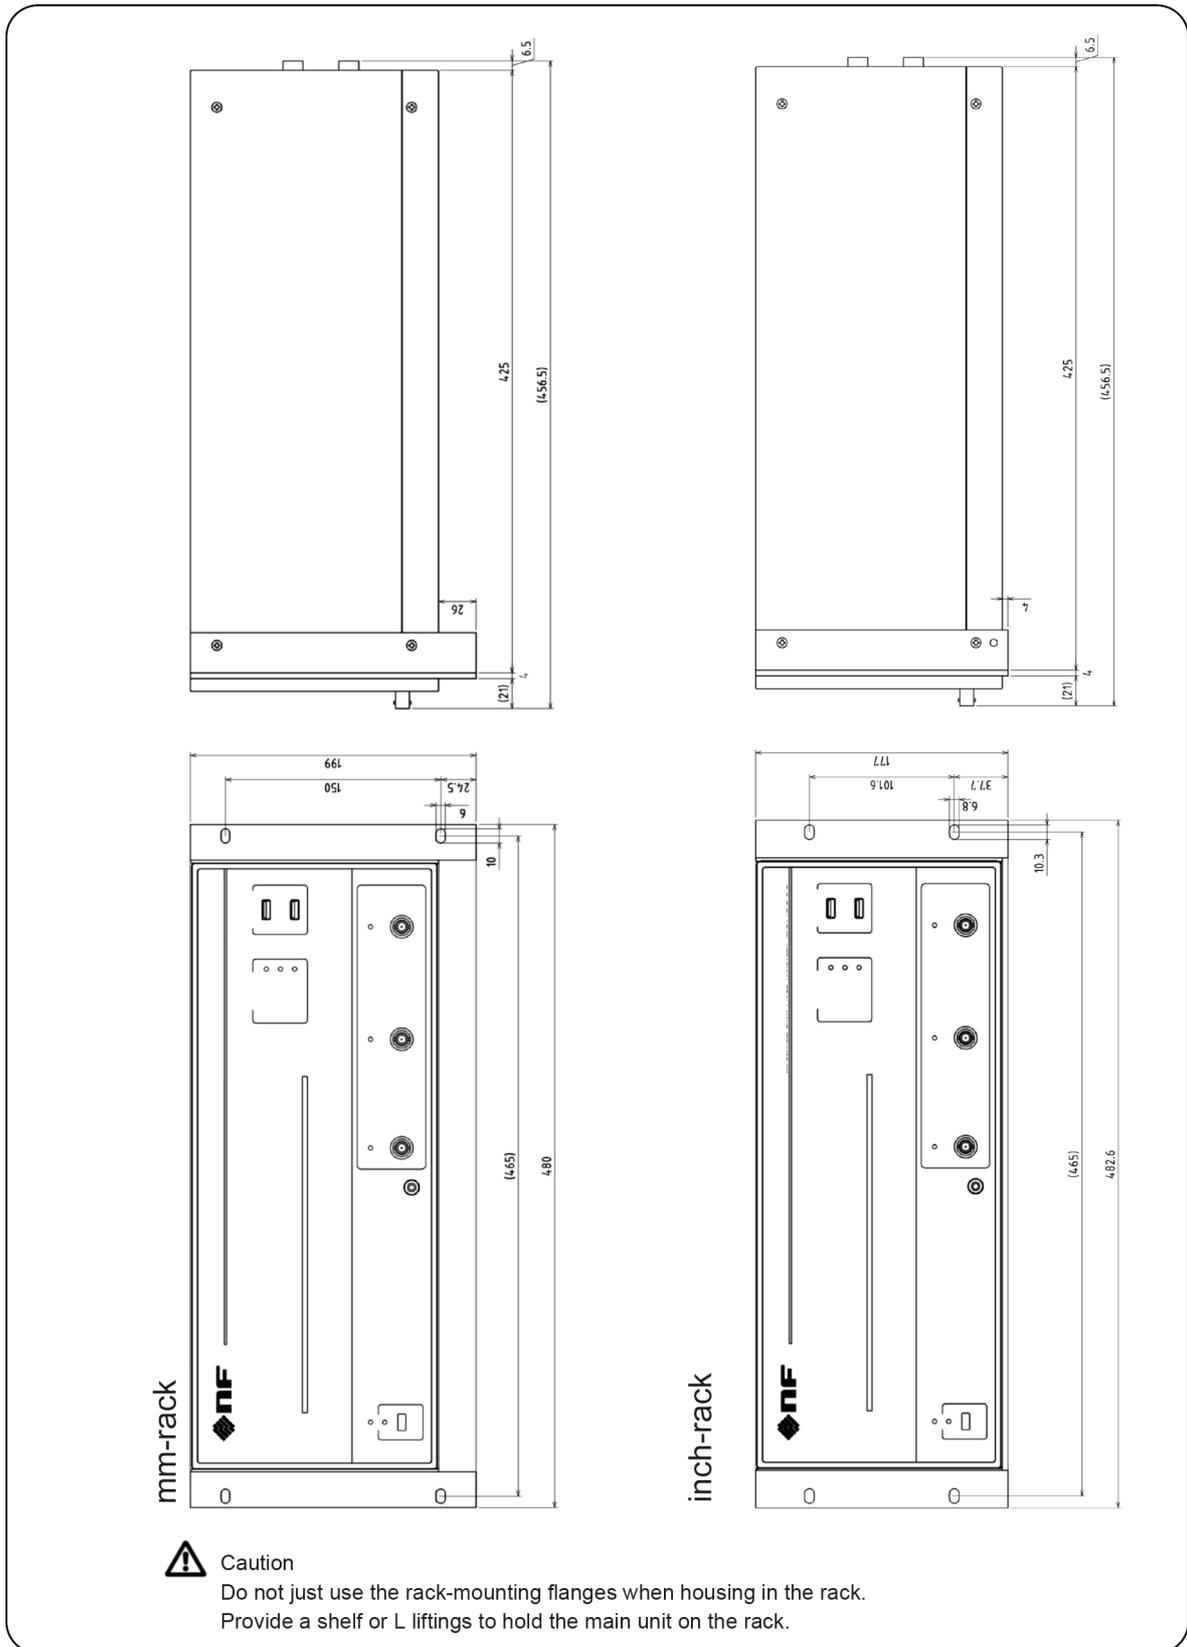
Size and dimensions of ZGA5905 rack mount
